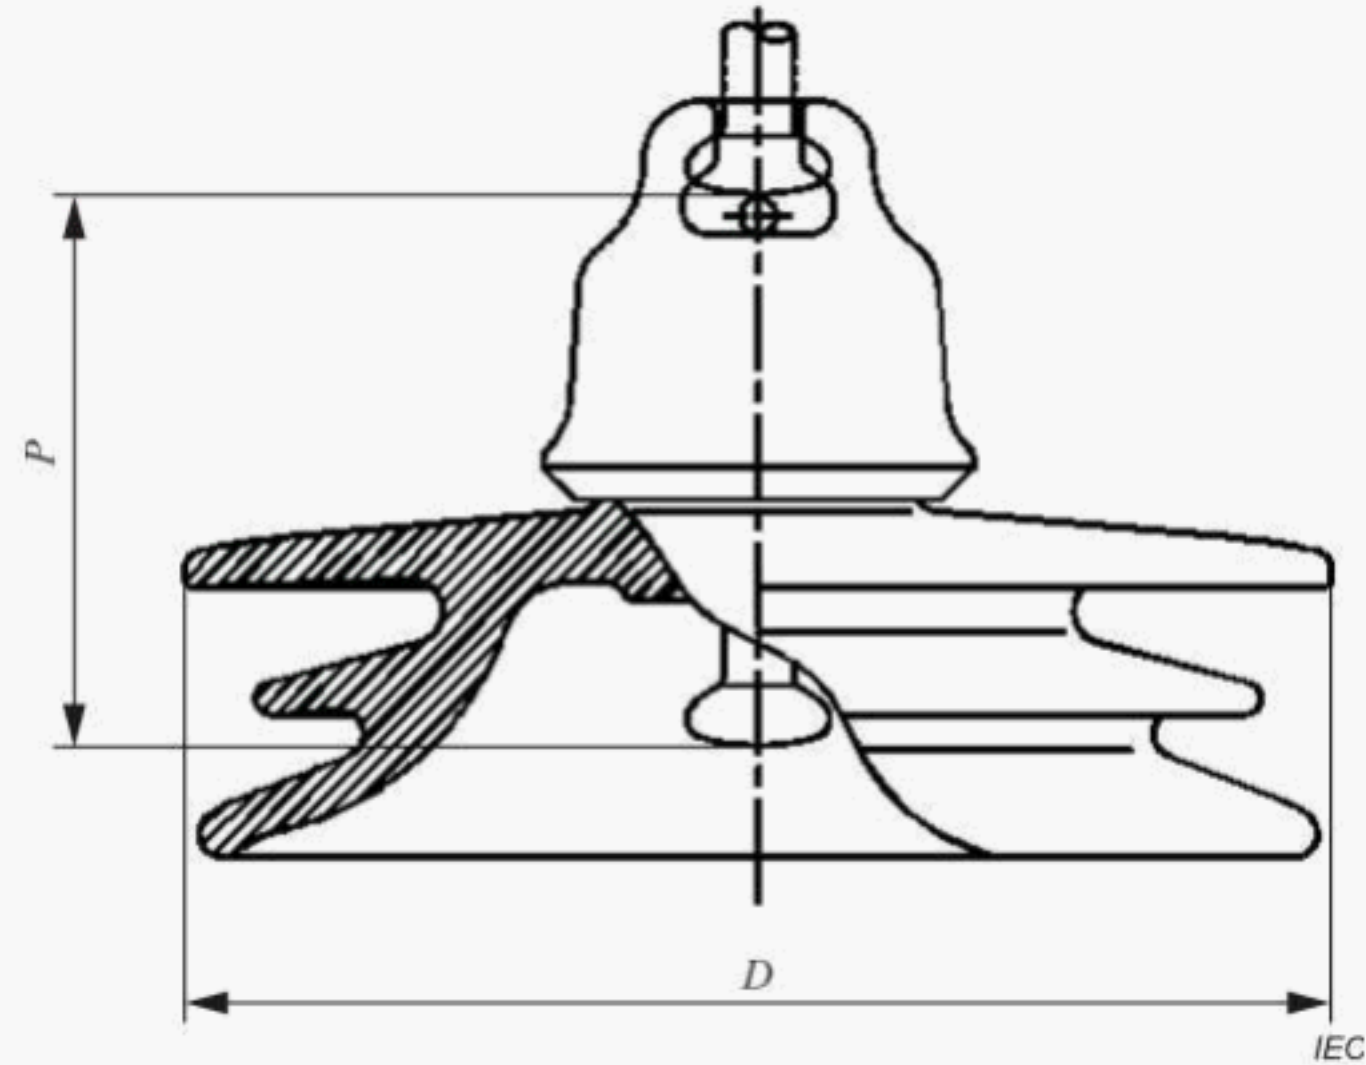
String insulator unit of three-alternating profile with ball and socket coupling
